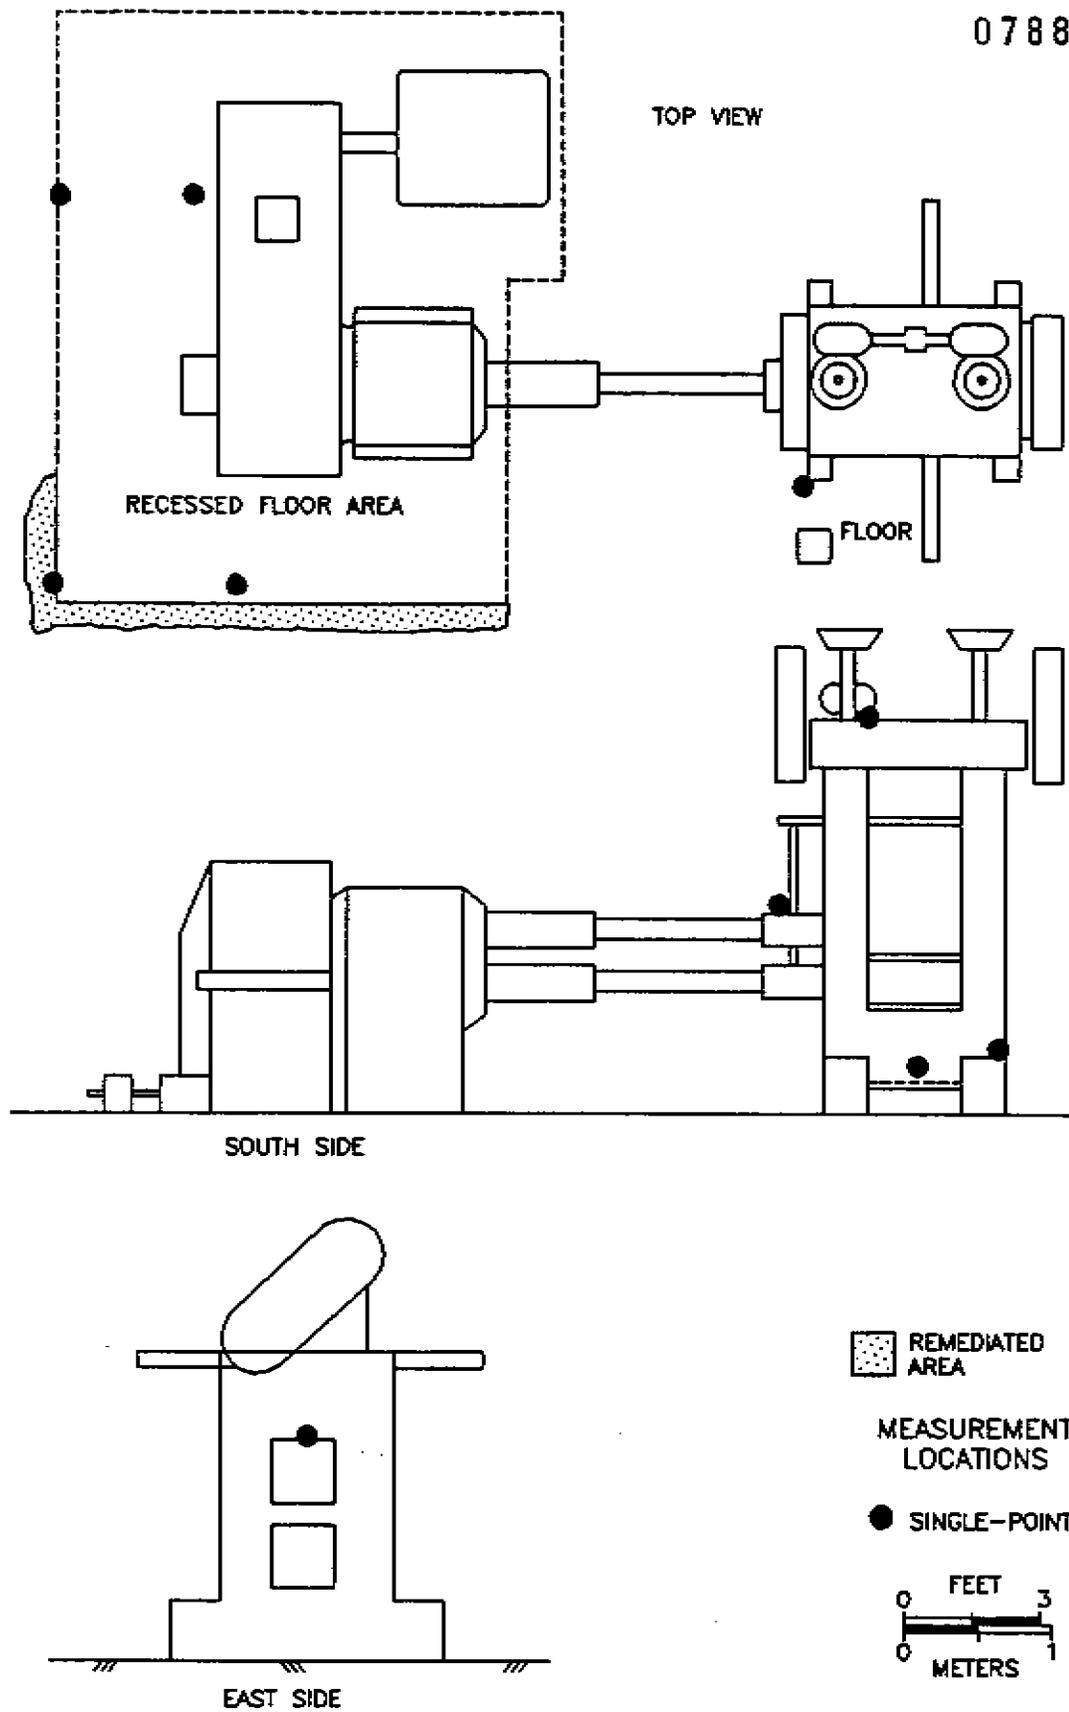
Building 30, Fabrication Room, Loma Roller #53550, Indicating Measurement Locations
